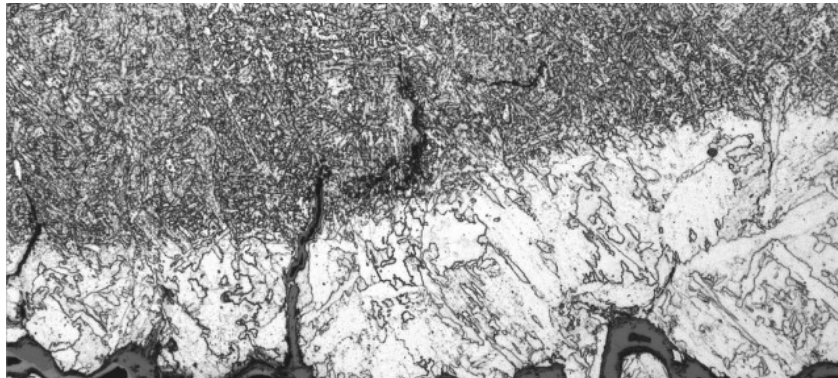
A detail of Figure 4; crack of specimen CT5 extending to weld metal.
